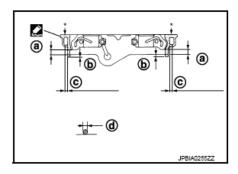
Identifying Liquid Gasket Applying Areas And Clearance Of Camshaft Bracket Courtesy of NISSAN NORTH AMERICA, INC.
